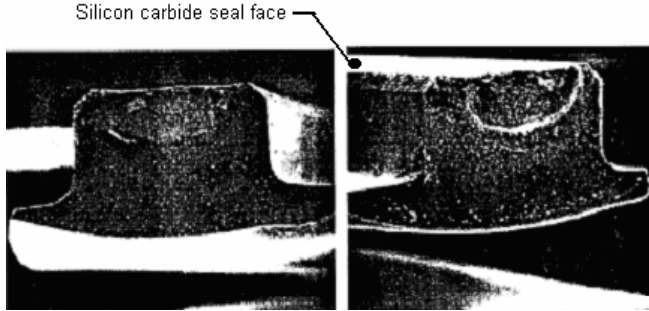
Opposing Fracture Surfaces of a Damaged Mechanical Seal, W. Daugherty, SRS
